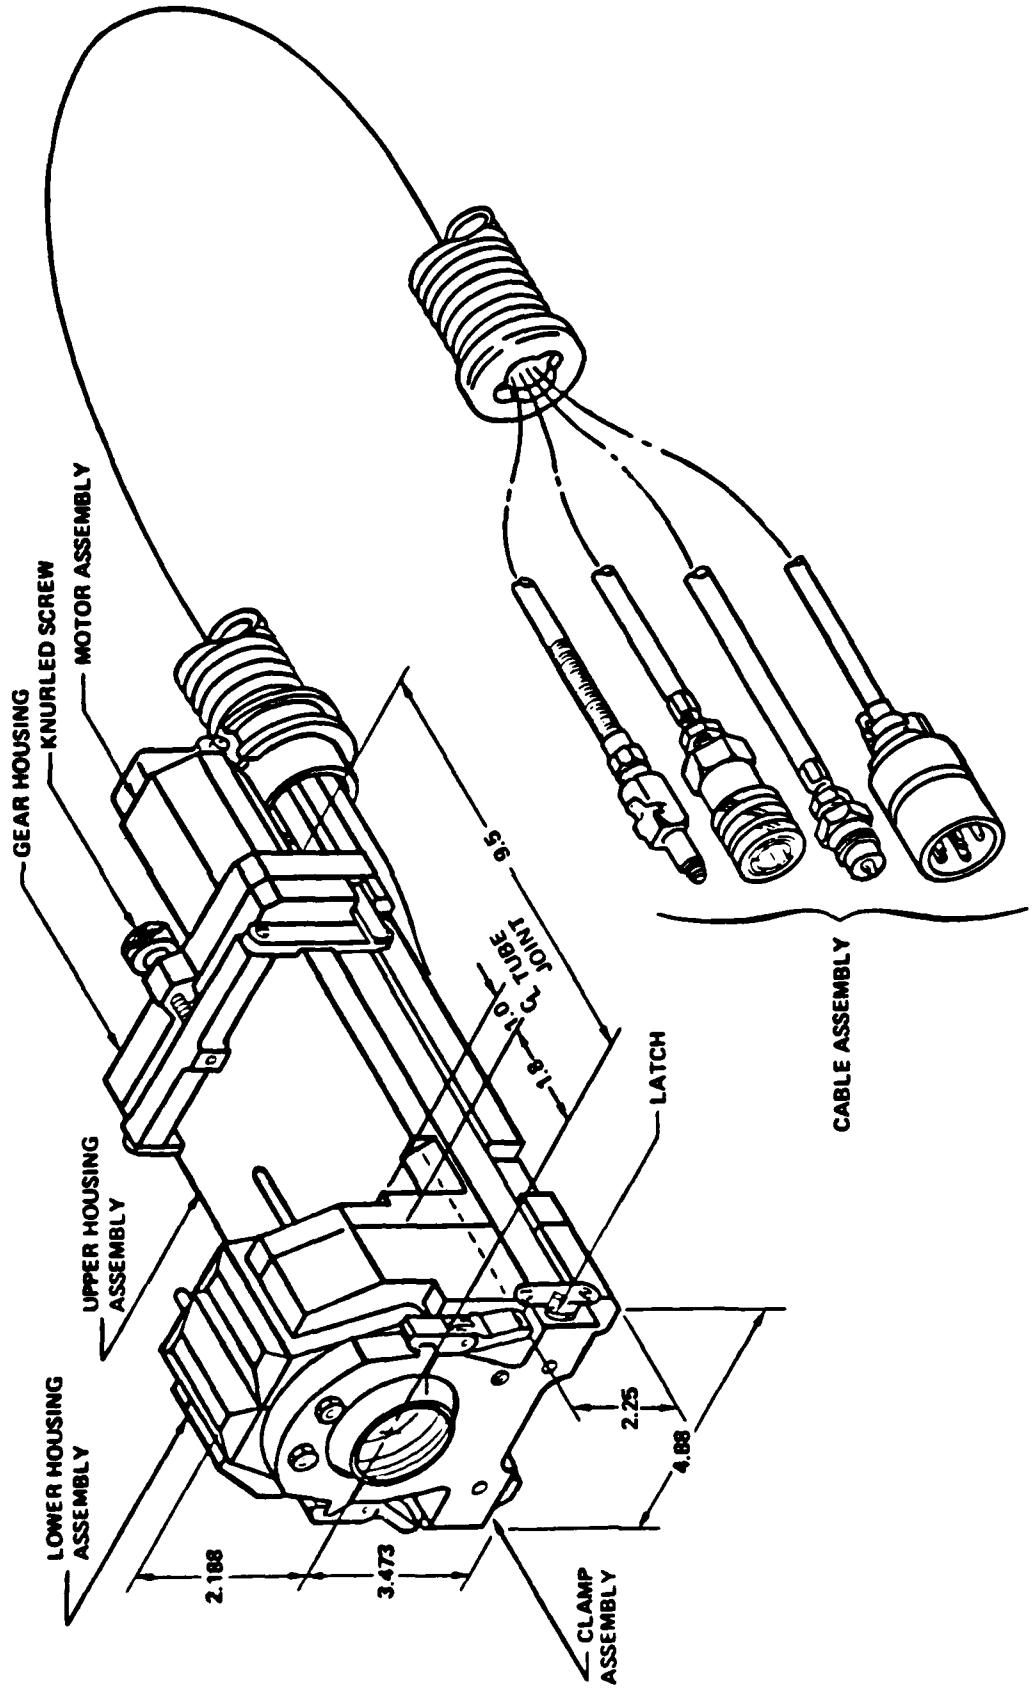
Isometric View of Model 2124 Prototype Weld Head
